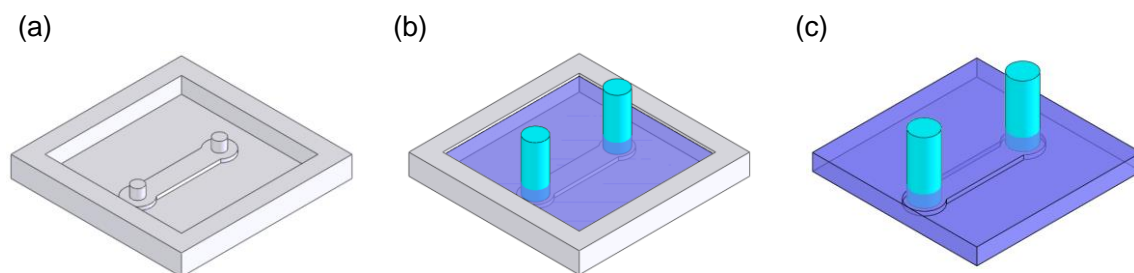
Fabrication steps for the cryo-cooling microfluidic channel structure. (a) Acrylic master mold fabrication using a rapid prototyping machine. (b) Silicone tubing insertion and PDMS pouring. (c) PDMS curing and releasing
